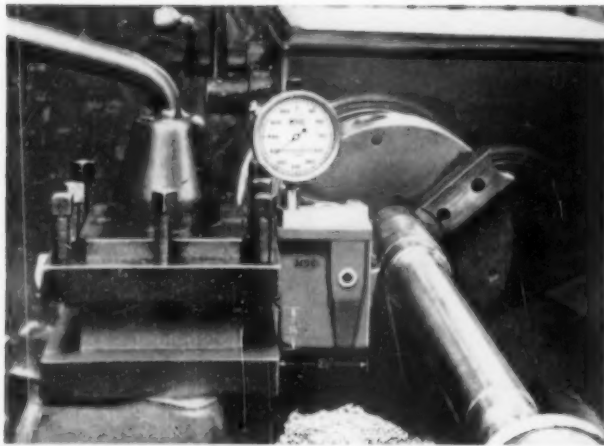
Component Dynamometer, design by G. Schlesinger. Made by Machine Shop Equipment, Ltd., London.
